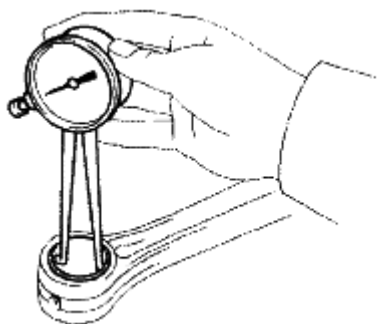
Measuring Inside Diameter Of Connecting Rod Bushing Using Caliper Gauge
